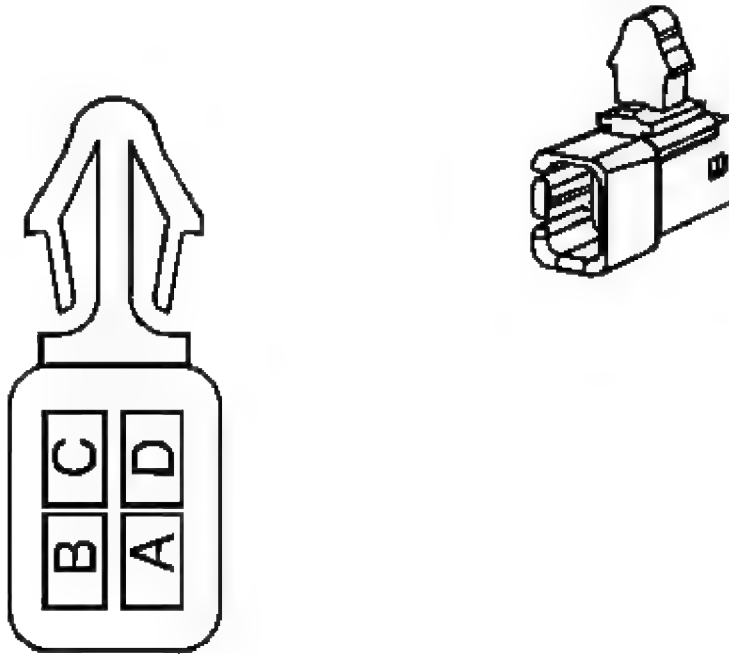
Right Front Heated Seat Cushion Element (KA1) Connector End View
